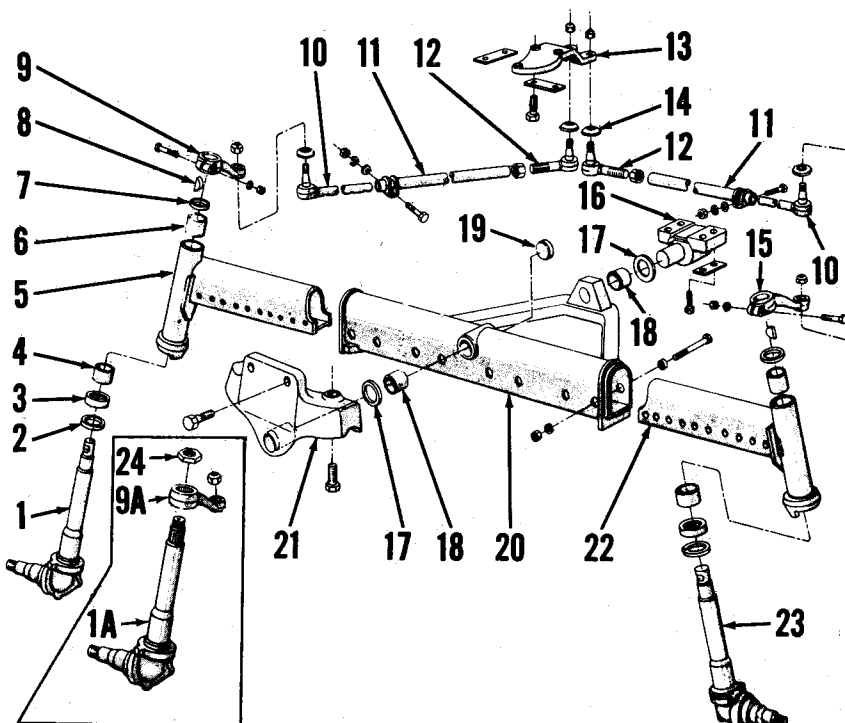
Exploded view of row crop type wide adjustable front axle. All purpose type front axle is similar except that center member (20) is reversed to provide shorter wheelbase. Note that later models are equipped with spindles (1A) and steering arms are retained by a nut as shown in inset. All parts except center steering arm (13) and inner tie-rod ends (12) are interchangeable between row crop and all purpose types. Refer to Figs. 2 and 3 for center steering arm views.
